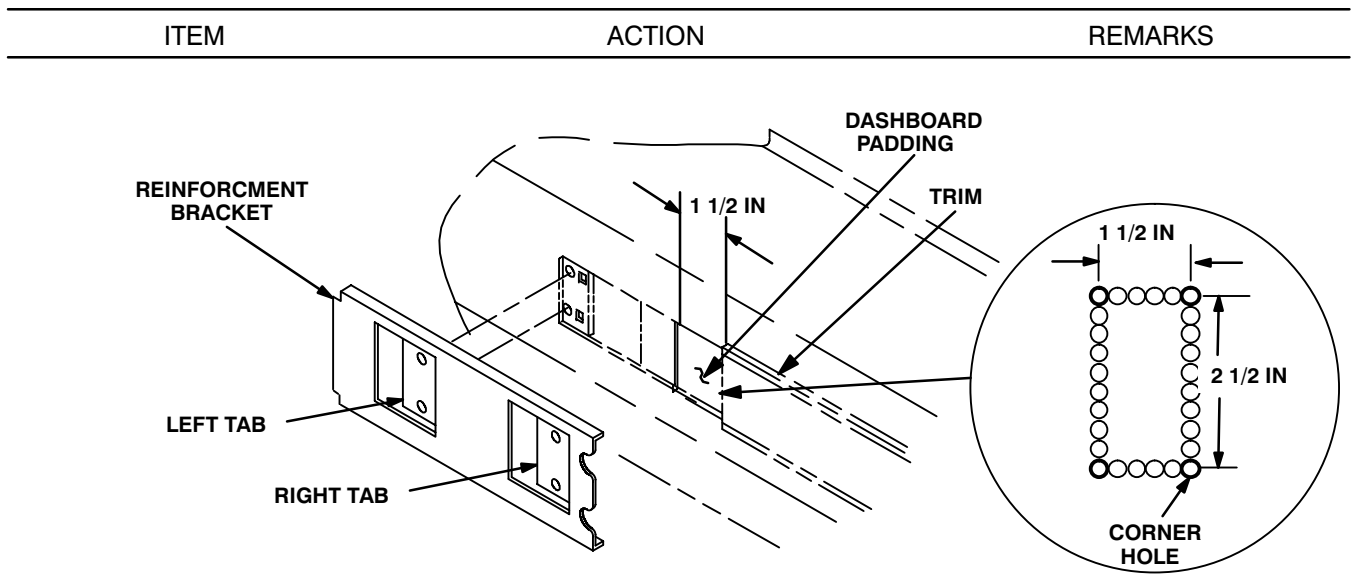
(2). Dashboard Modification: Drill Pattern for Padding Removal
